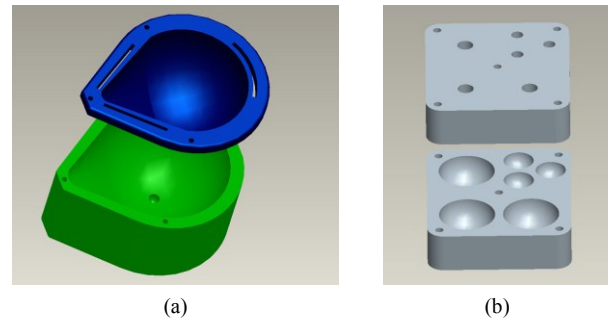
Designed mould for the fabrication of the anthropomorphic phantom: (a) external mould (b) inclusions mould.
